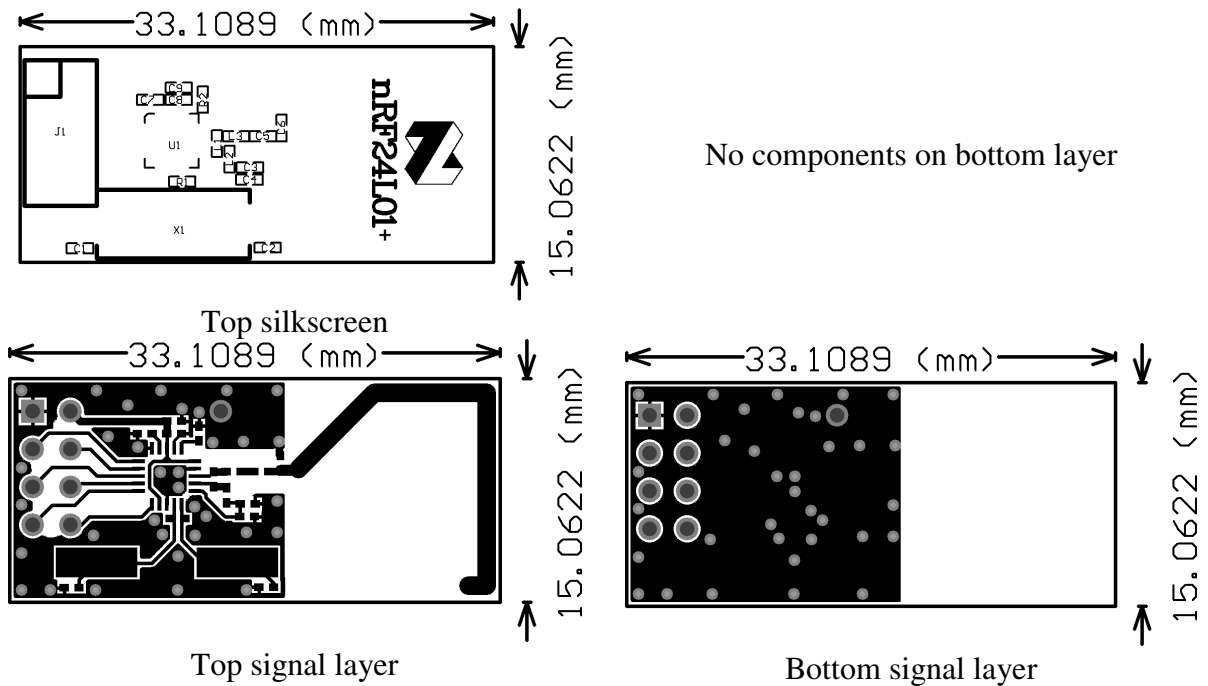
nRF24L01+ REFMOD with PCB antenna PCB layout
